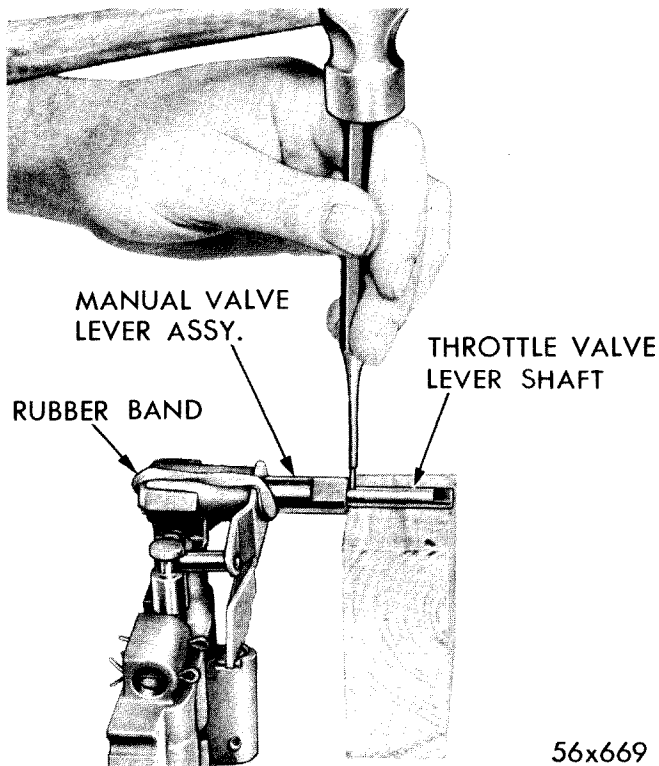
Removal and Installation of Throttle Valve Lever Shaft Pin
